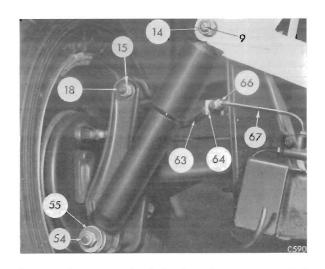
Rear suspension brake hose, damper and vertical link attachments
